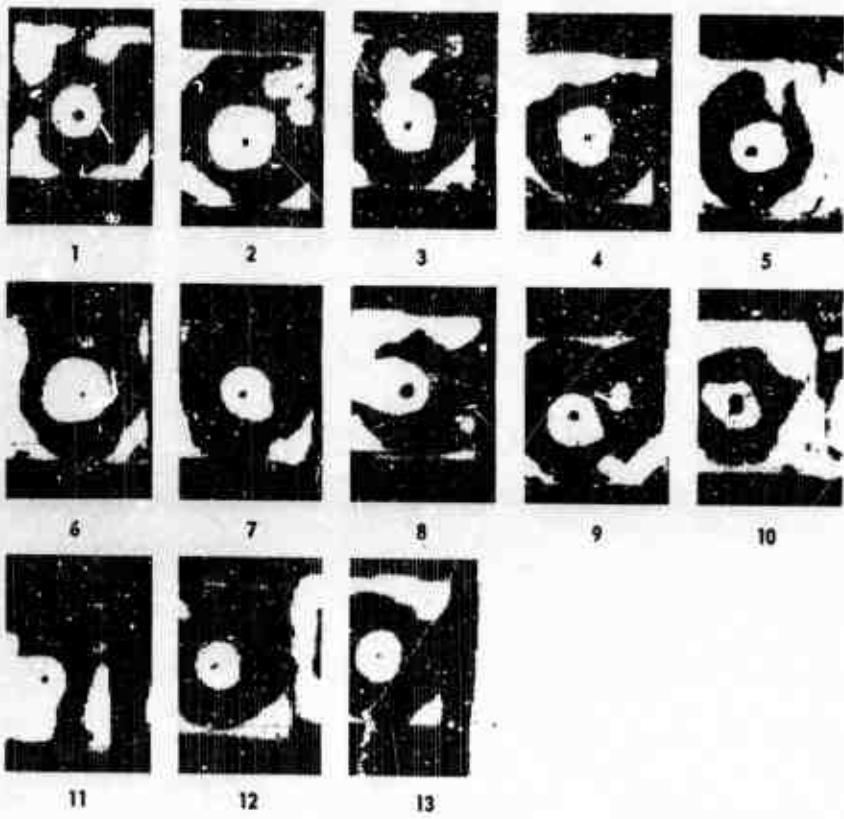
C-Scan Record of Series 1 Welds.
